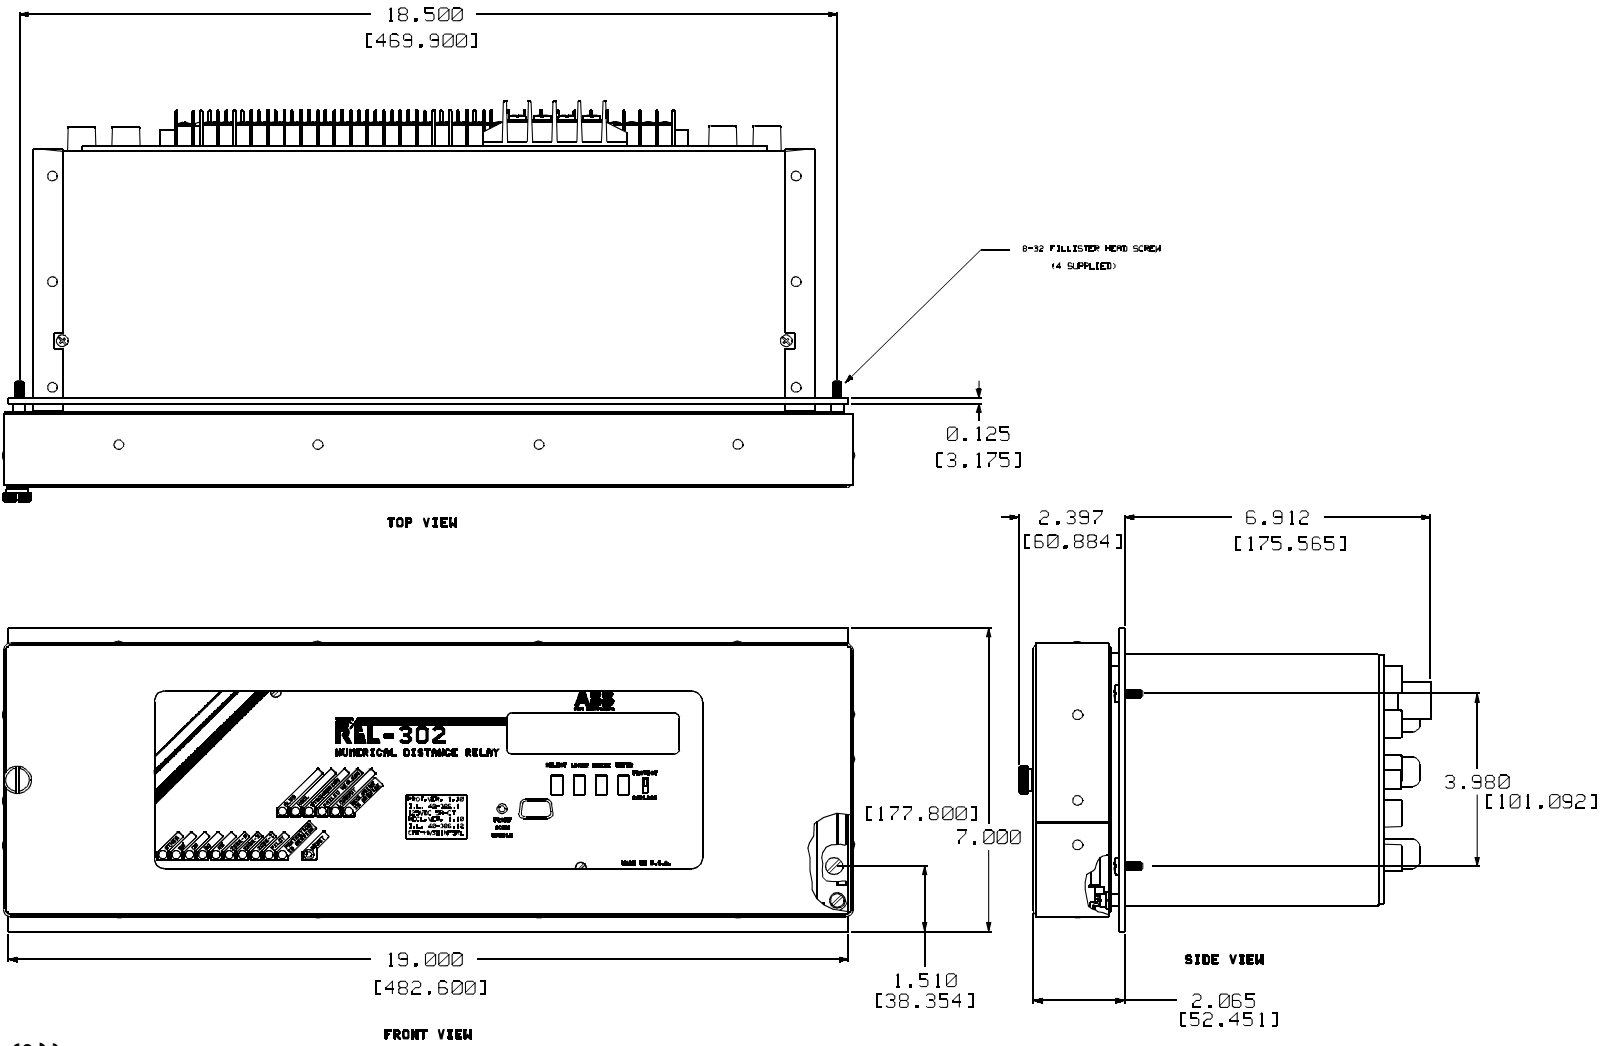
REL 301/302 Outline Drawing (Horizontal)
